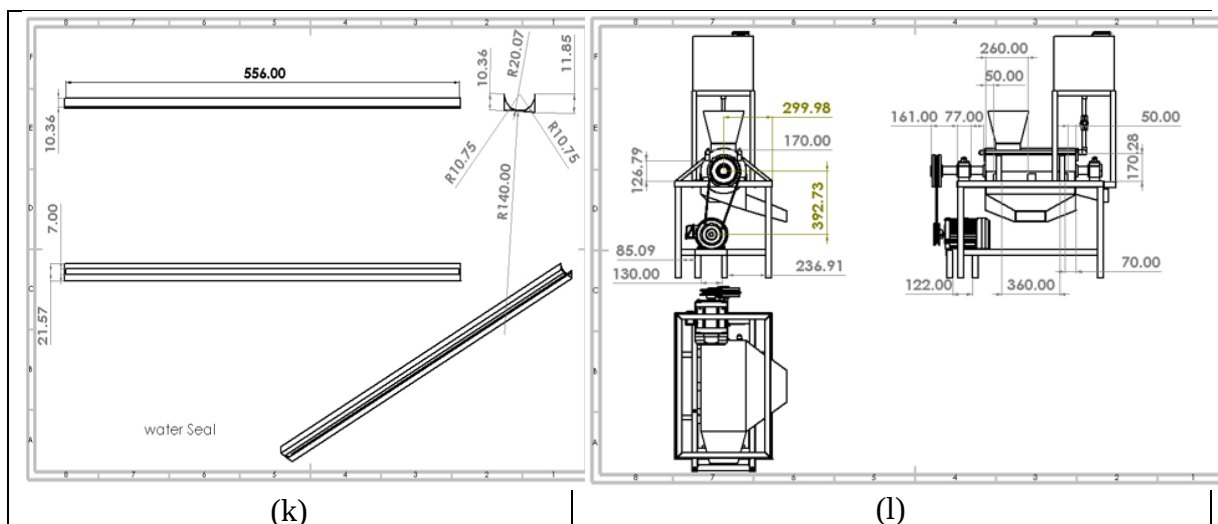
Showing (k) Water Seals and (l) Isometric Views of the Machine
